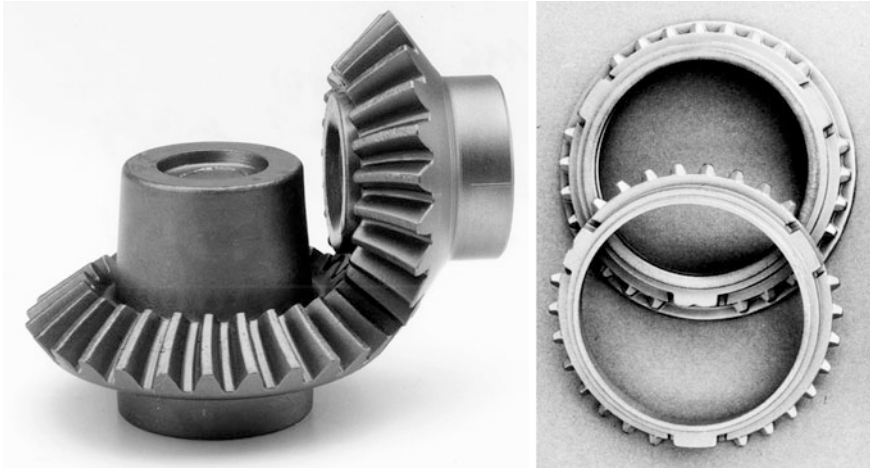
Examples of precision-forged gear parts—*left* bevel gear pair (0.9/0.4 kg) with ready-to-install forged toothings; *right* precision-forged synchronizer rings, forged and additionally pre-turned design (Source ThyssenKrupp Präzisionsschmiede GmbH)
